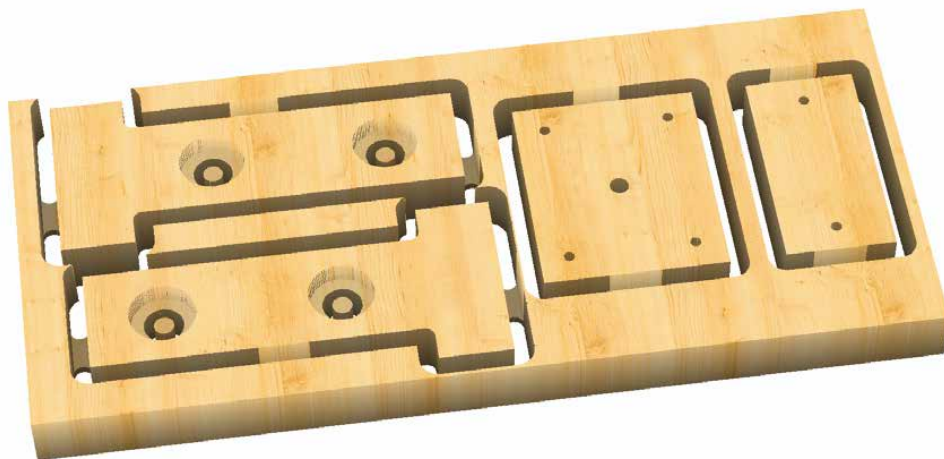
Simulated design of the front and back faces of the clock mount (left) and top and bottom mounting plates (right). Large recessed holes are to hold roller bearings.
